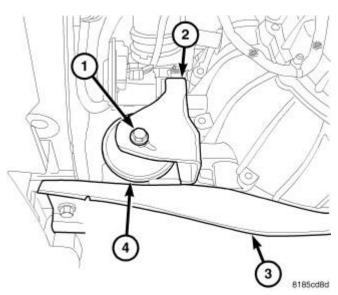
FRONT MOUNT THROUGH BOLT Courtesy of CHRYSLER LLC
